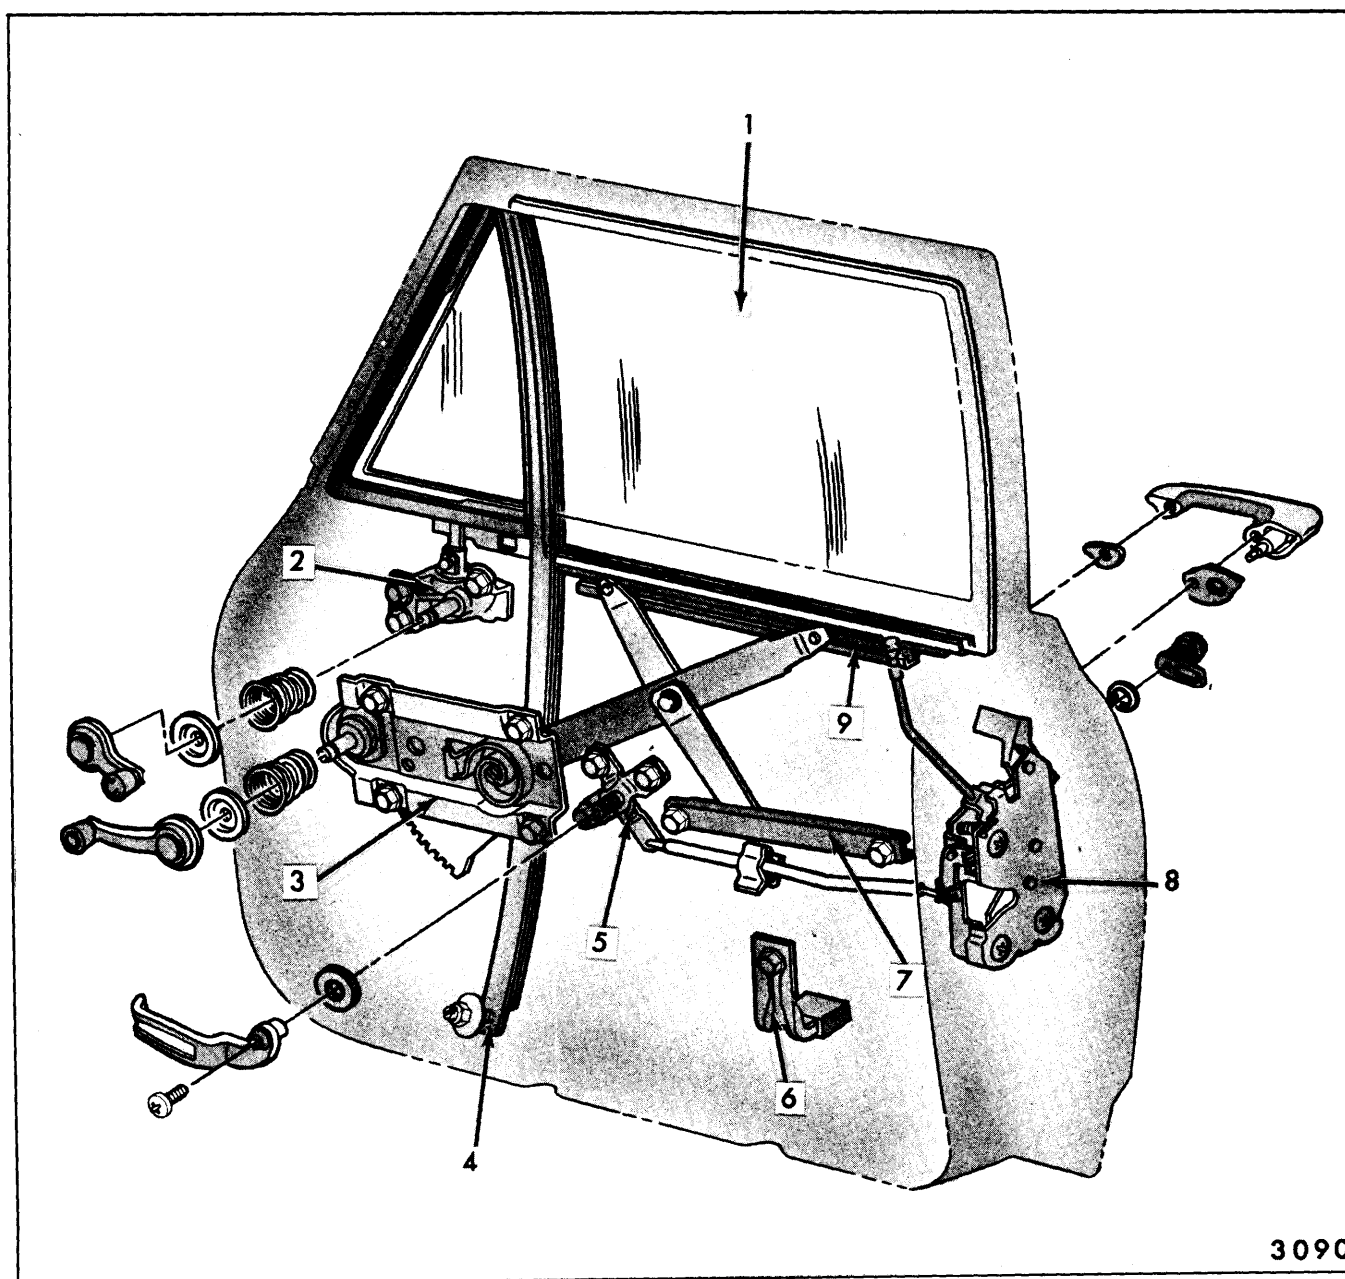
Front Door Hardware - "A" Closed Styles
